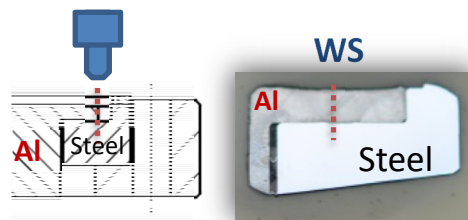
Part of flange with Al-insert. Position of welding seam.
